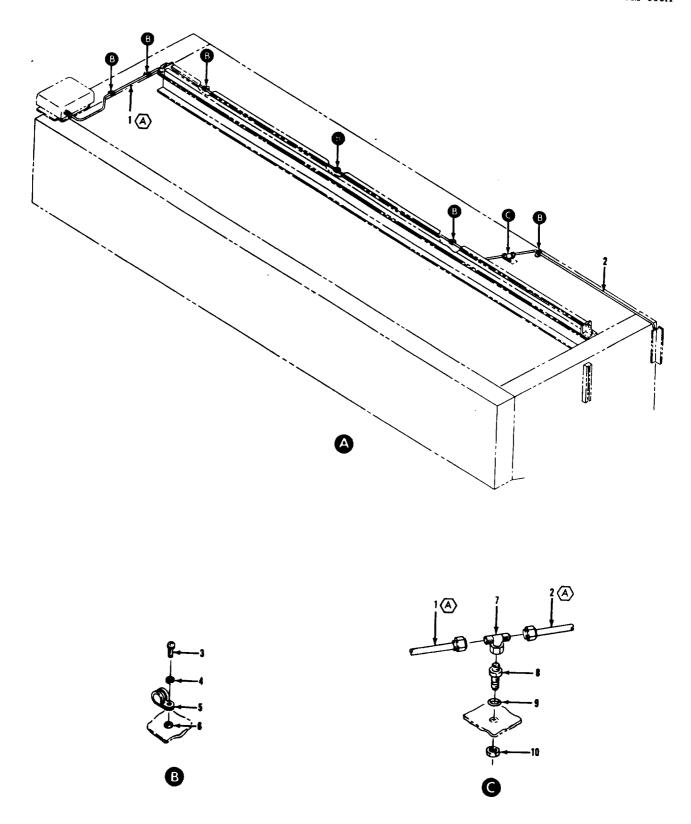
Tubing Installation (Sheet 2 of 17)
